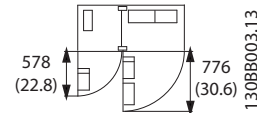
Space in front of IP21/IP54 enclosure type, frame size F9
